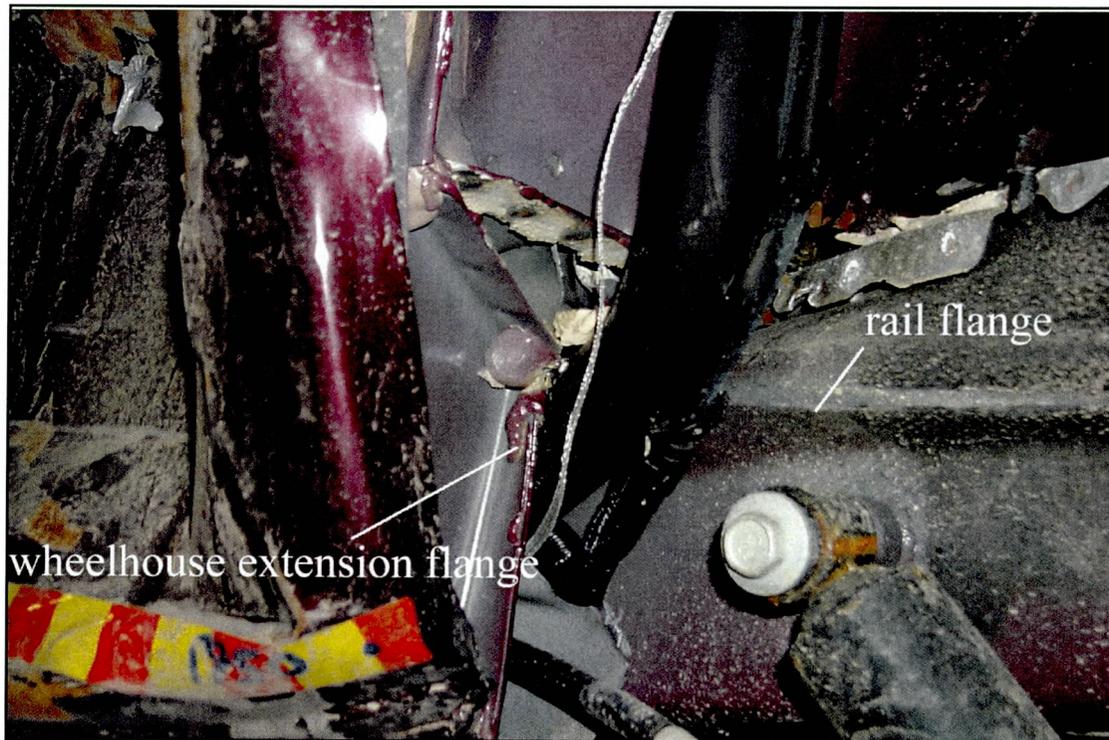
Filler Tube Loading from Wheelhouse Extension (CX0305).
